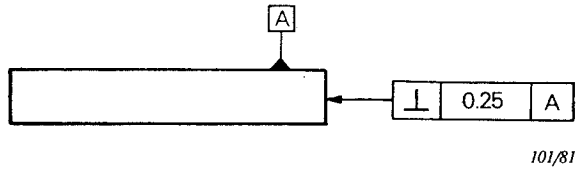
The surface on which the tolerance is given should be contained between two surfaces 0.25 apart and perpendicular to the reference plane A.
